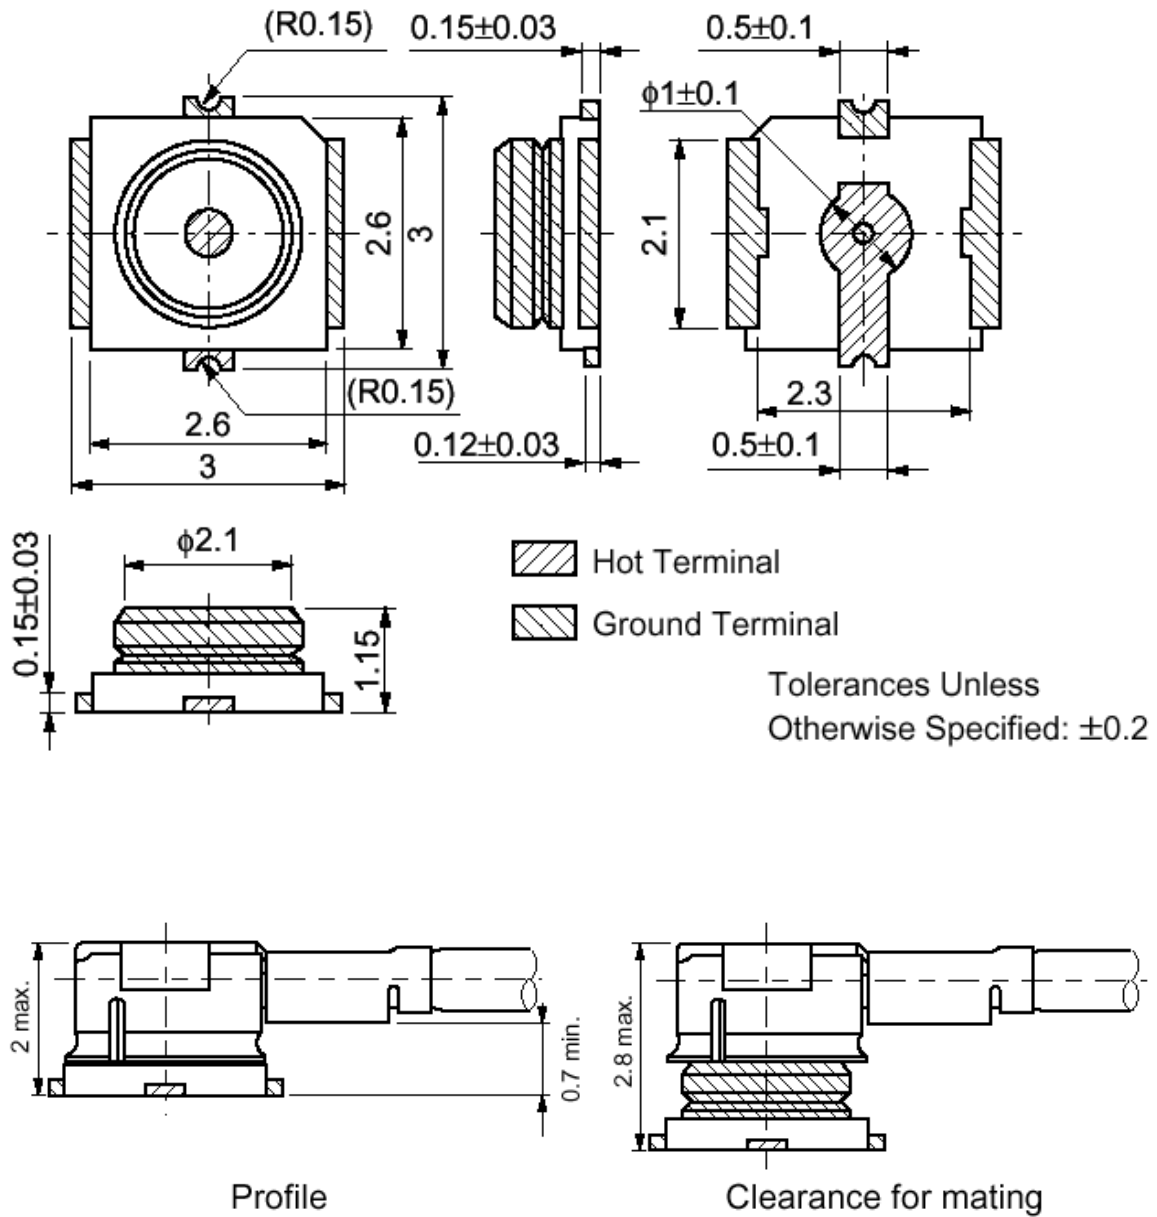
Mechanical dimensions of MuRata GSC connector (in mm)
